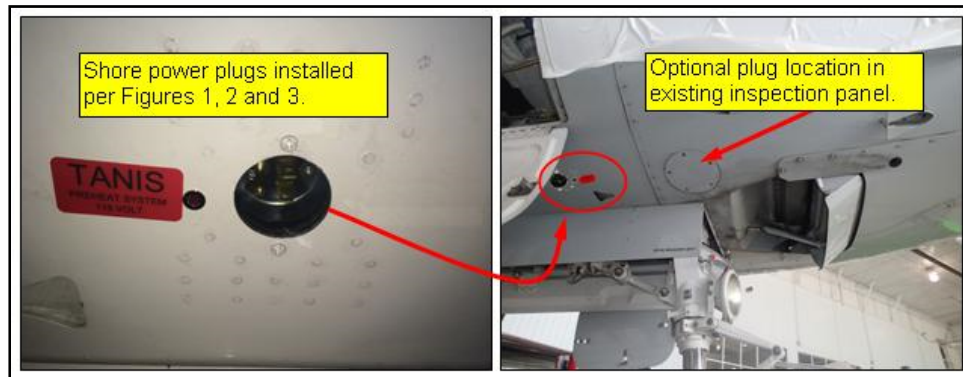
Example optional locations for Plug 1, engine system. Left or right of nose wheel, located with Tanis doubler TD02838 or door kit TD02840, dwg 02840. Complete door kit may be installed in this location and used for rear plug(s). 2-place door kit TD03152 dwg 03152, available separately, may be used to co-locate Plug 1 and Plug 2 in tail section forward of rear access panel refer to Figure 5.2.
